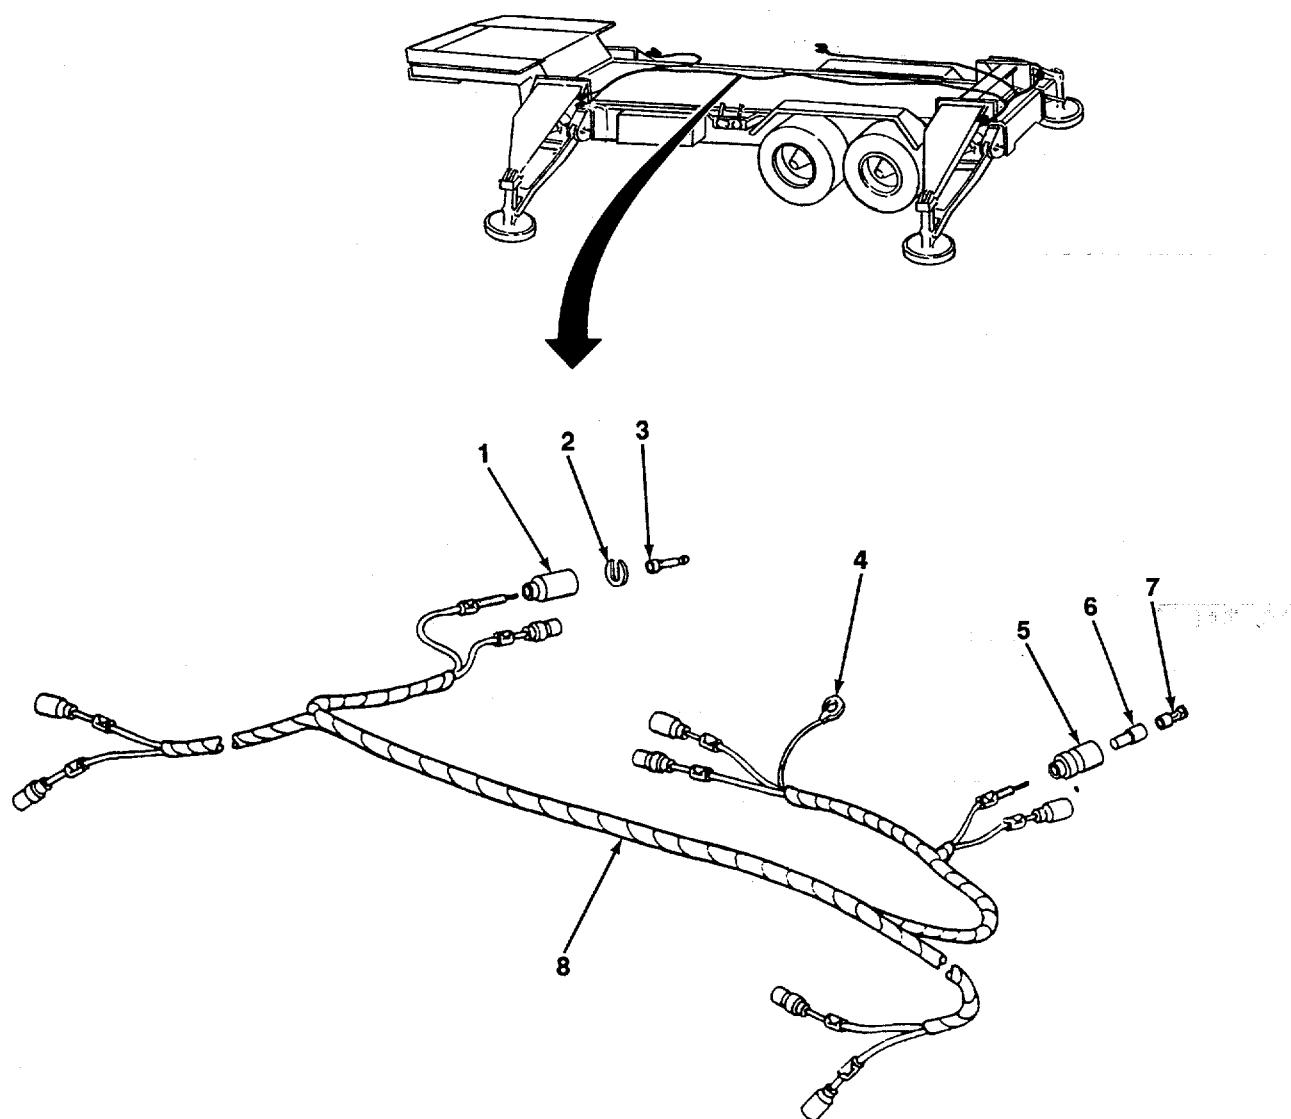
INTERLOCK BRANCHED WIRING HARNESS ASSEMBLY.
